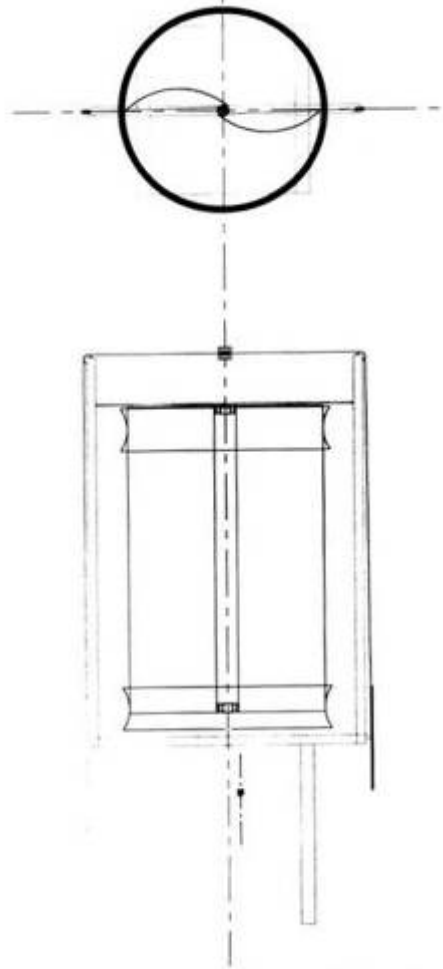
Drawing of Design Development Fabrication and Testing of Small Vertical Axis Wind Turbinr
